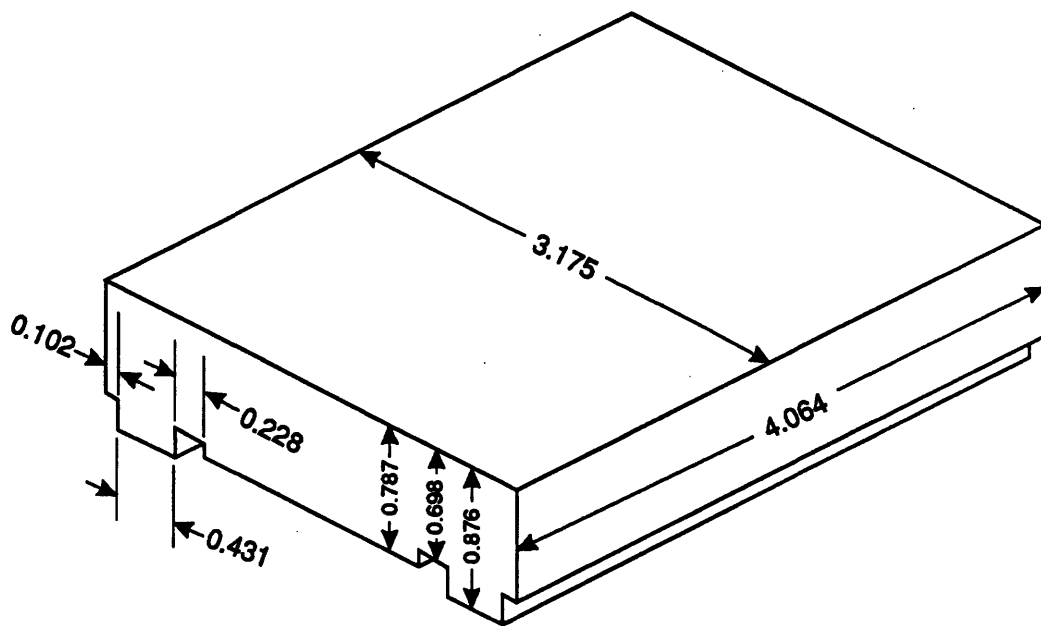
Drawing of 3380 slider with dimensions in millimeters.
